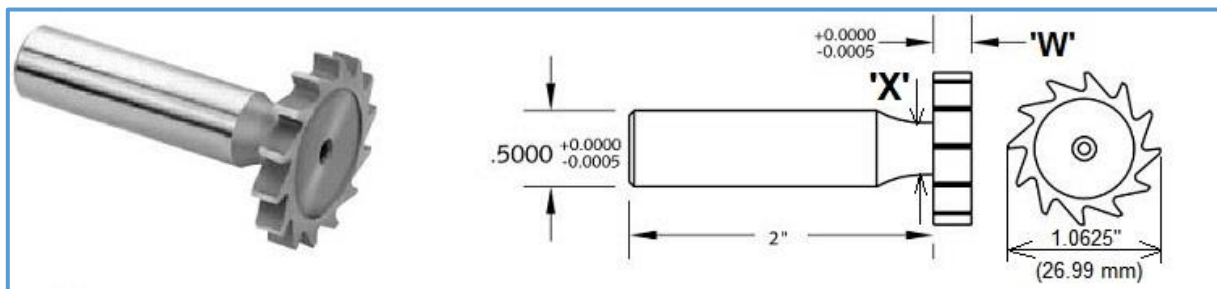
Woodruff keyway cutter for milling the material from the cylinder head.
